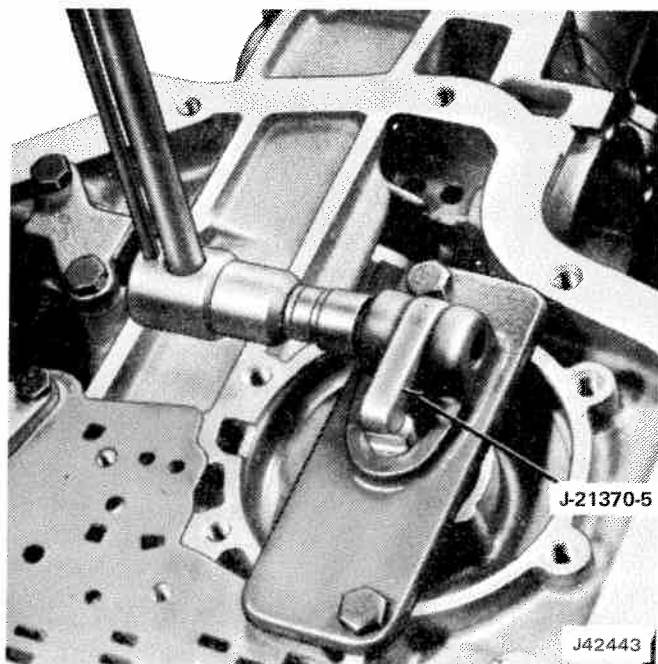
Checking Band-Apply Pin of Rear Bands
